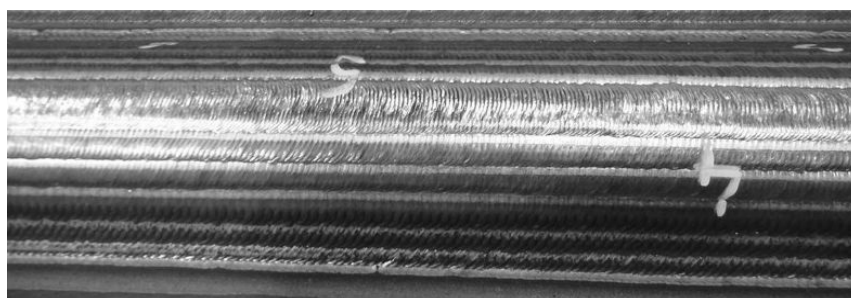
Pattern welded in the protection of the four-component gas
